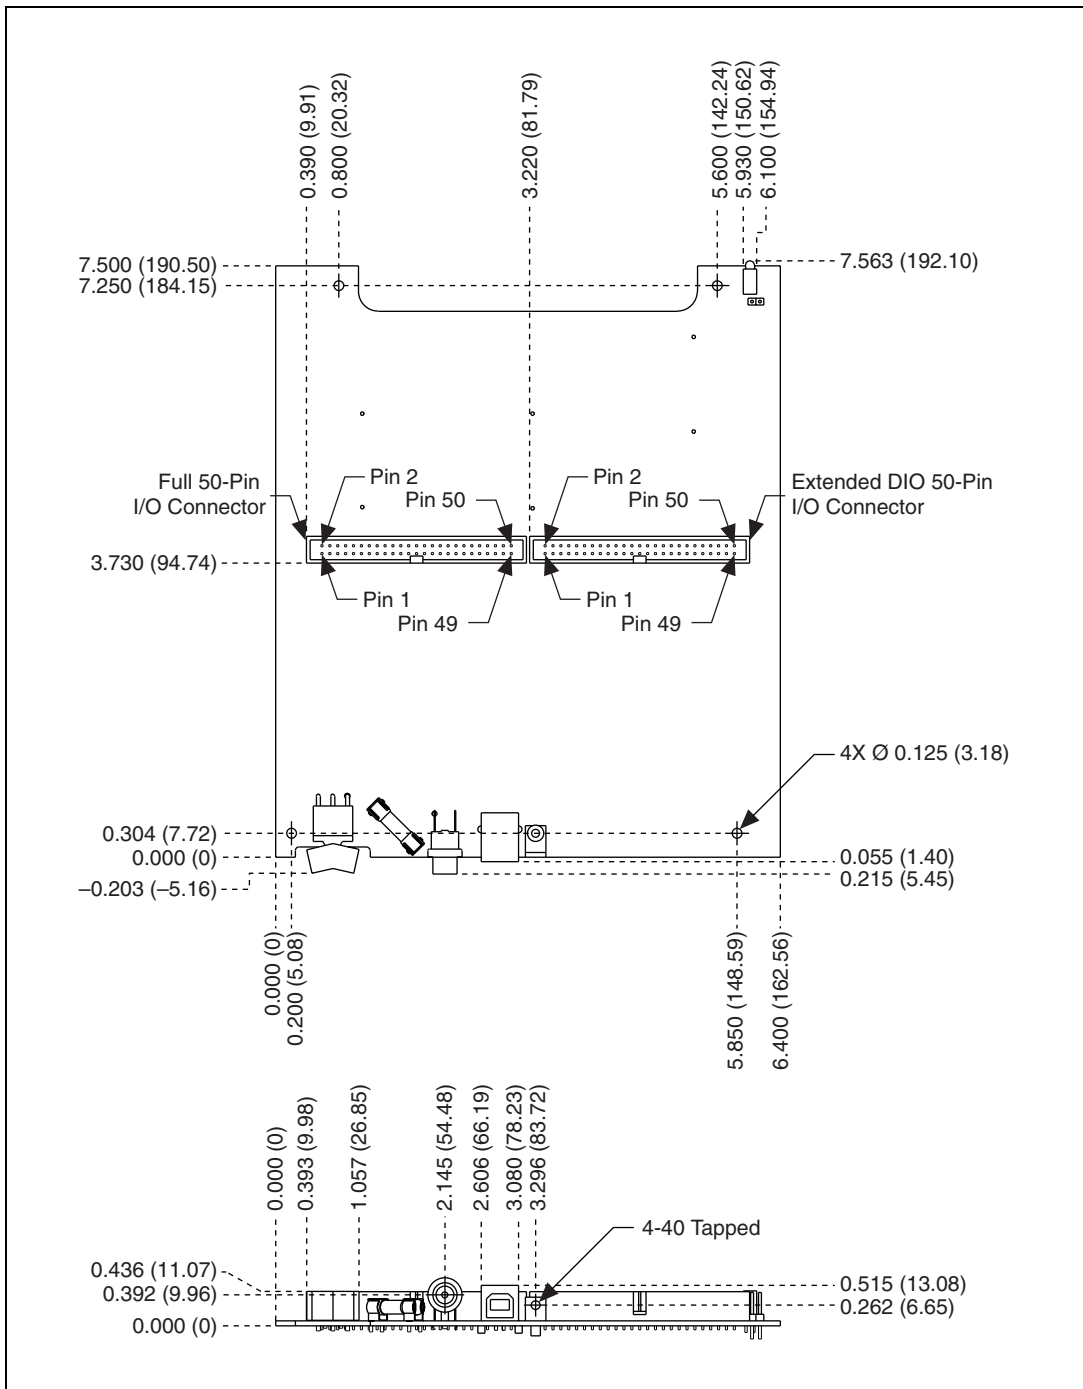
DAQPad-6016 OEM Dimensions in Inches and Millimeters (191 mm × 163 mm Version)
